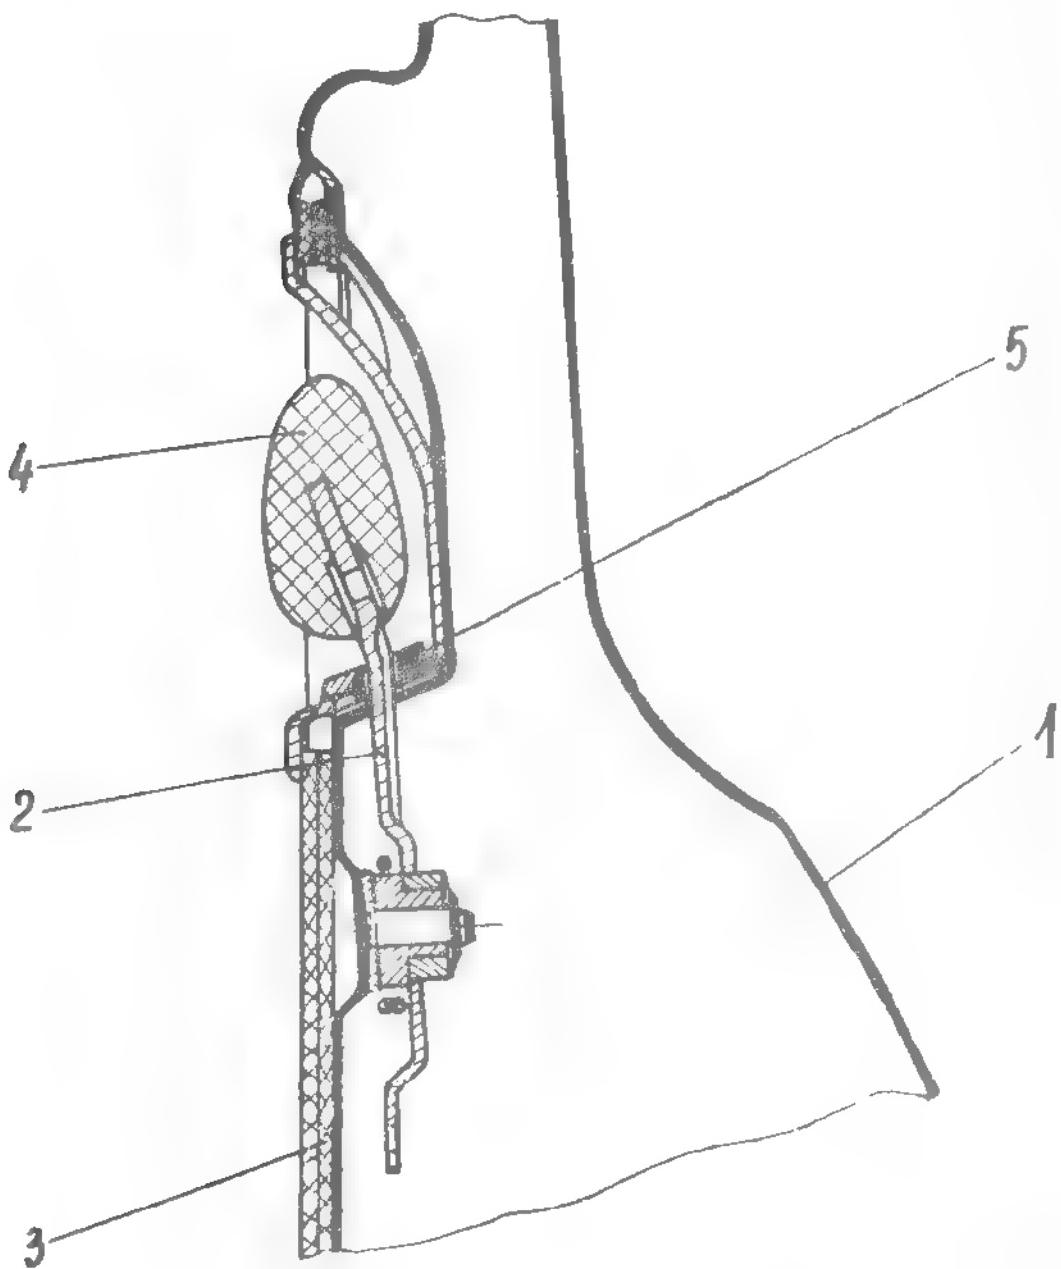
INNER FRONT DOOR LOCKING HANDLE
